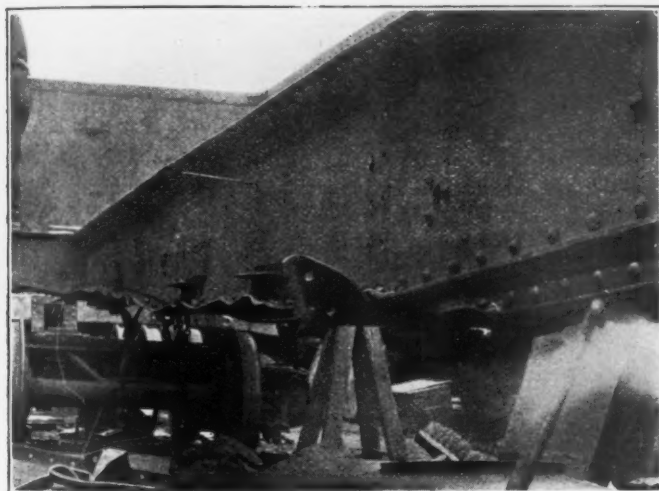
LOWER EDGE OF CENTER SILL DAMAGED ON CLASS O-17 GONDOLA CAR.
